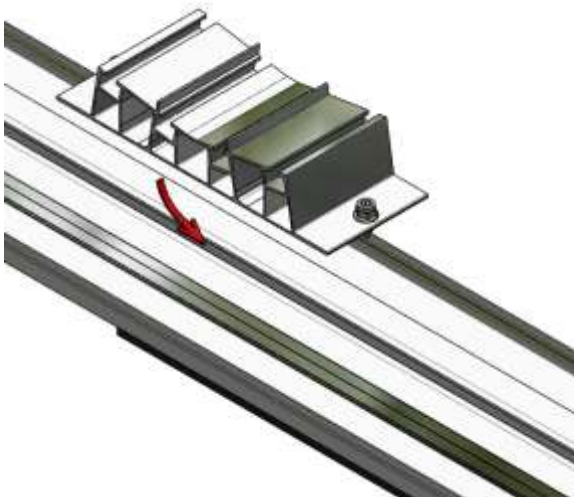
Slide the “bottom support double G3.1” onto the slot channel
